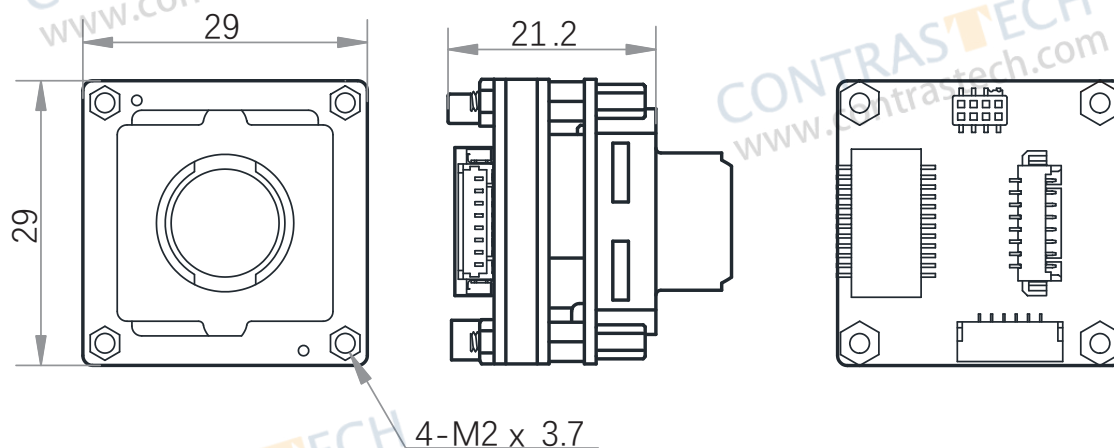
Mechanical Dimensions (in mm) of the M12-mount WTB interface Cameras with 29 * 29 * 21.2 mm.
